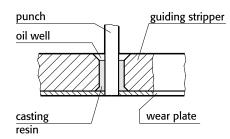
Cast punch guide with oil well and wear plate underneath stripper
